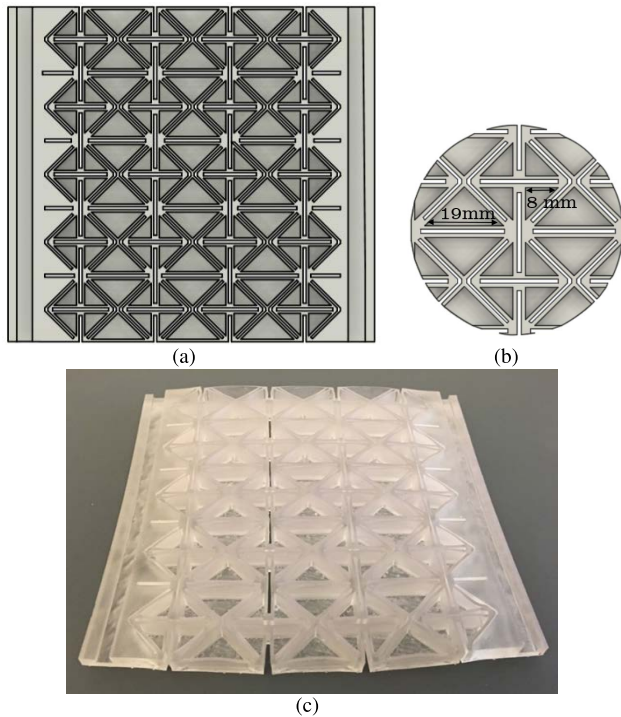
(a) CAD design of the SLA printed flexible lattice developed to reconfigure a DO in combination with a linear mechanical actuator; the grooves running on both sides are for fitting rigid handles. (b) Higher magnification view of the unit cells of the triangular structure of the flexible lattice, and (c) a photograph of the printed flexible lattice.
